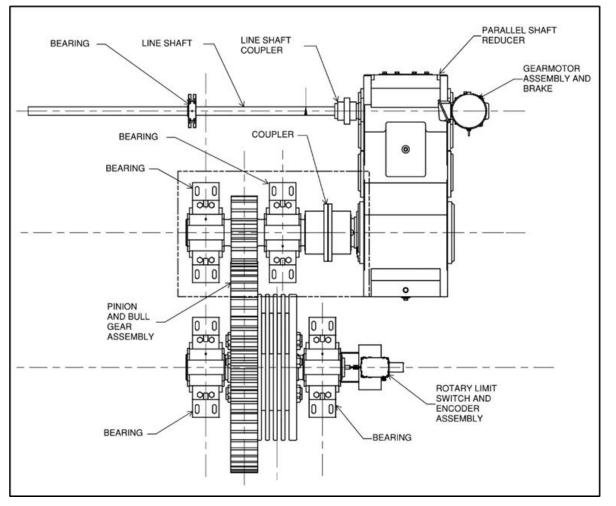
General hoist machinery layout with bull and pinion gear assembly
